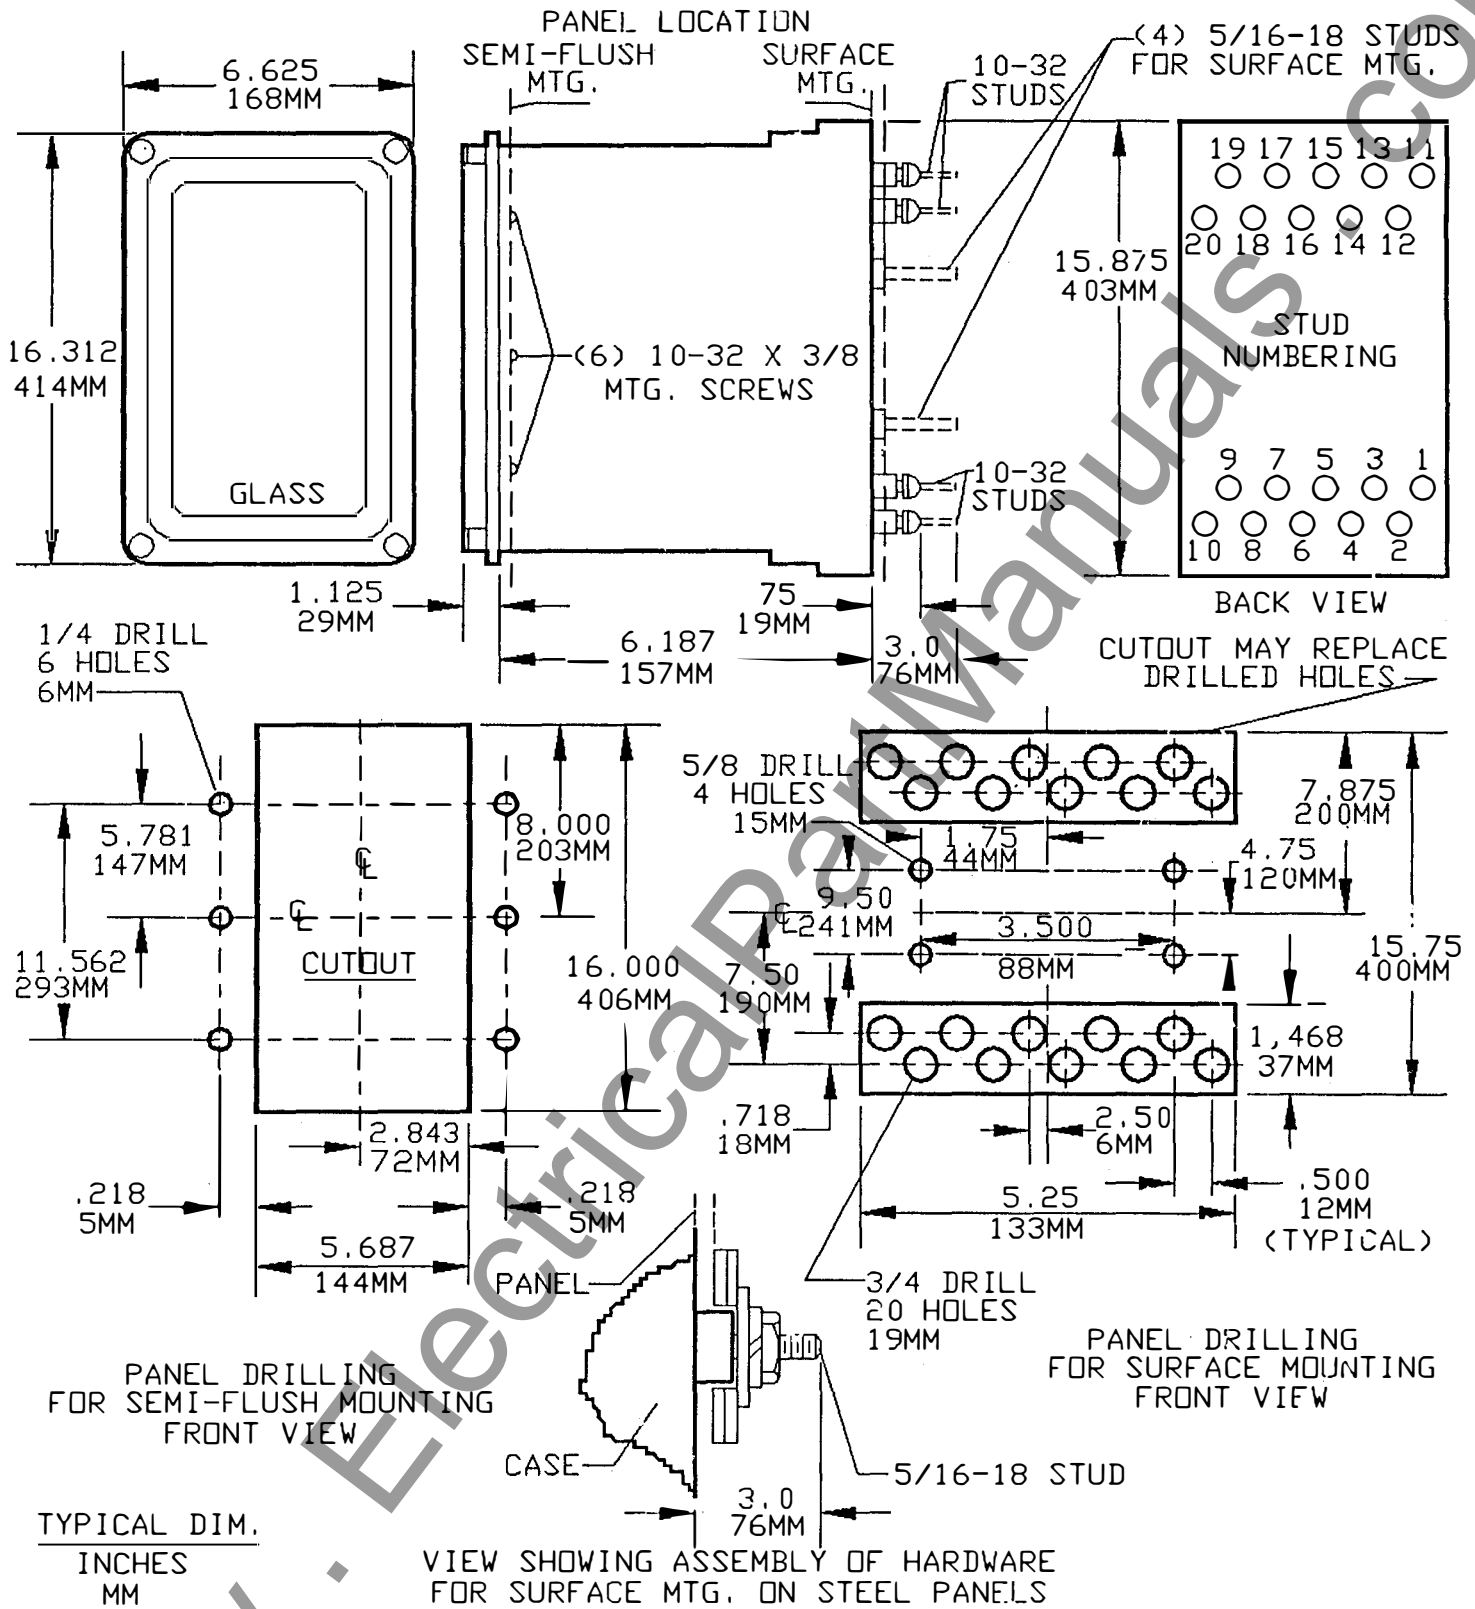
(K-6209274 [6]) Outline Drawing and Panel-Drilling Dimensions for the Size M2 Case Used for Type SPD Relays
